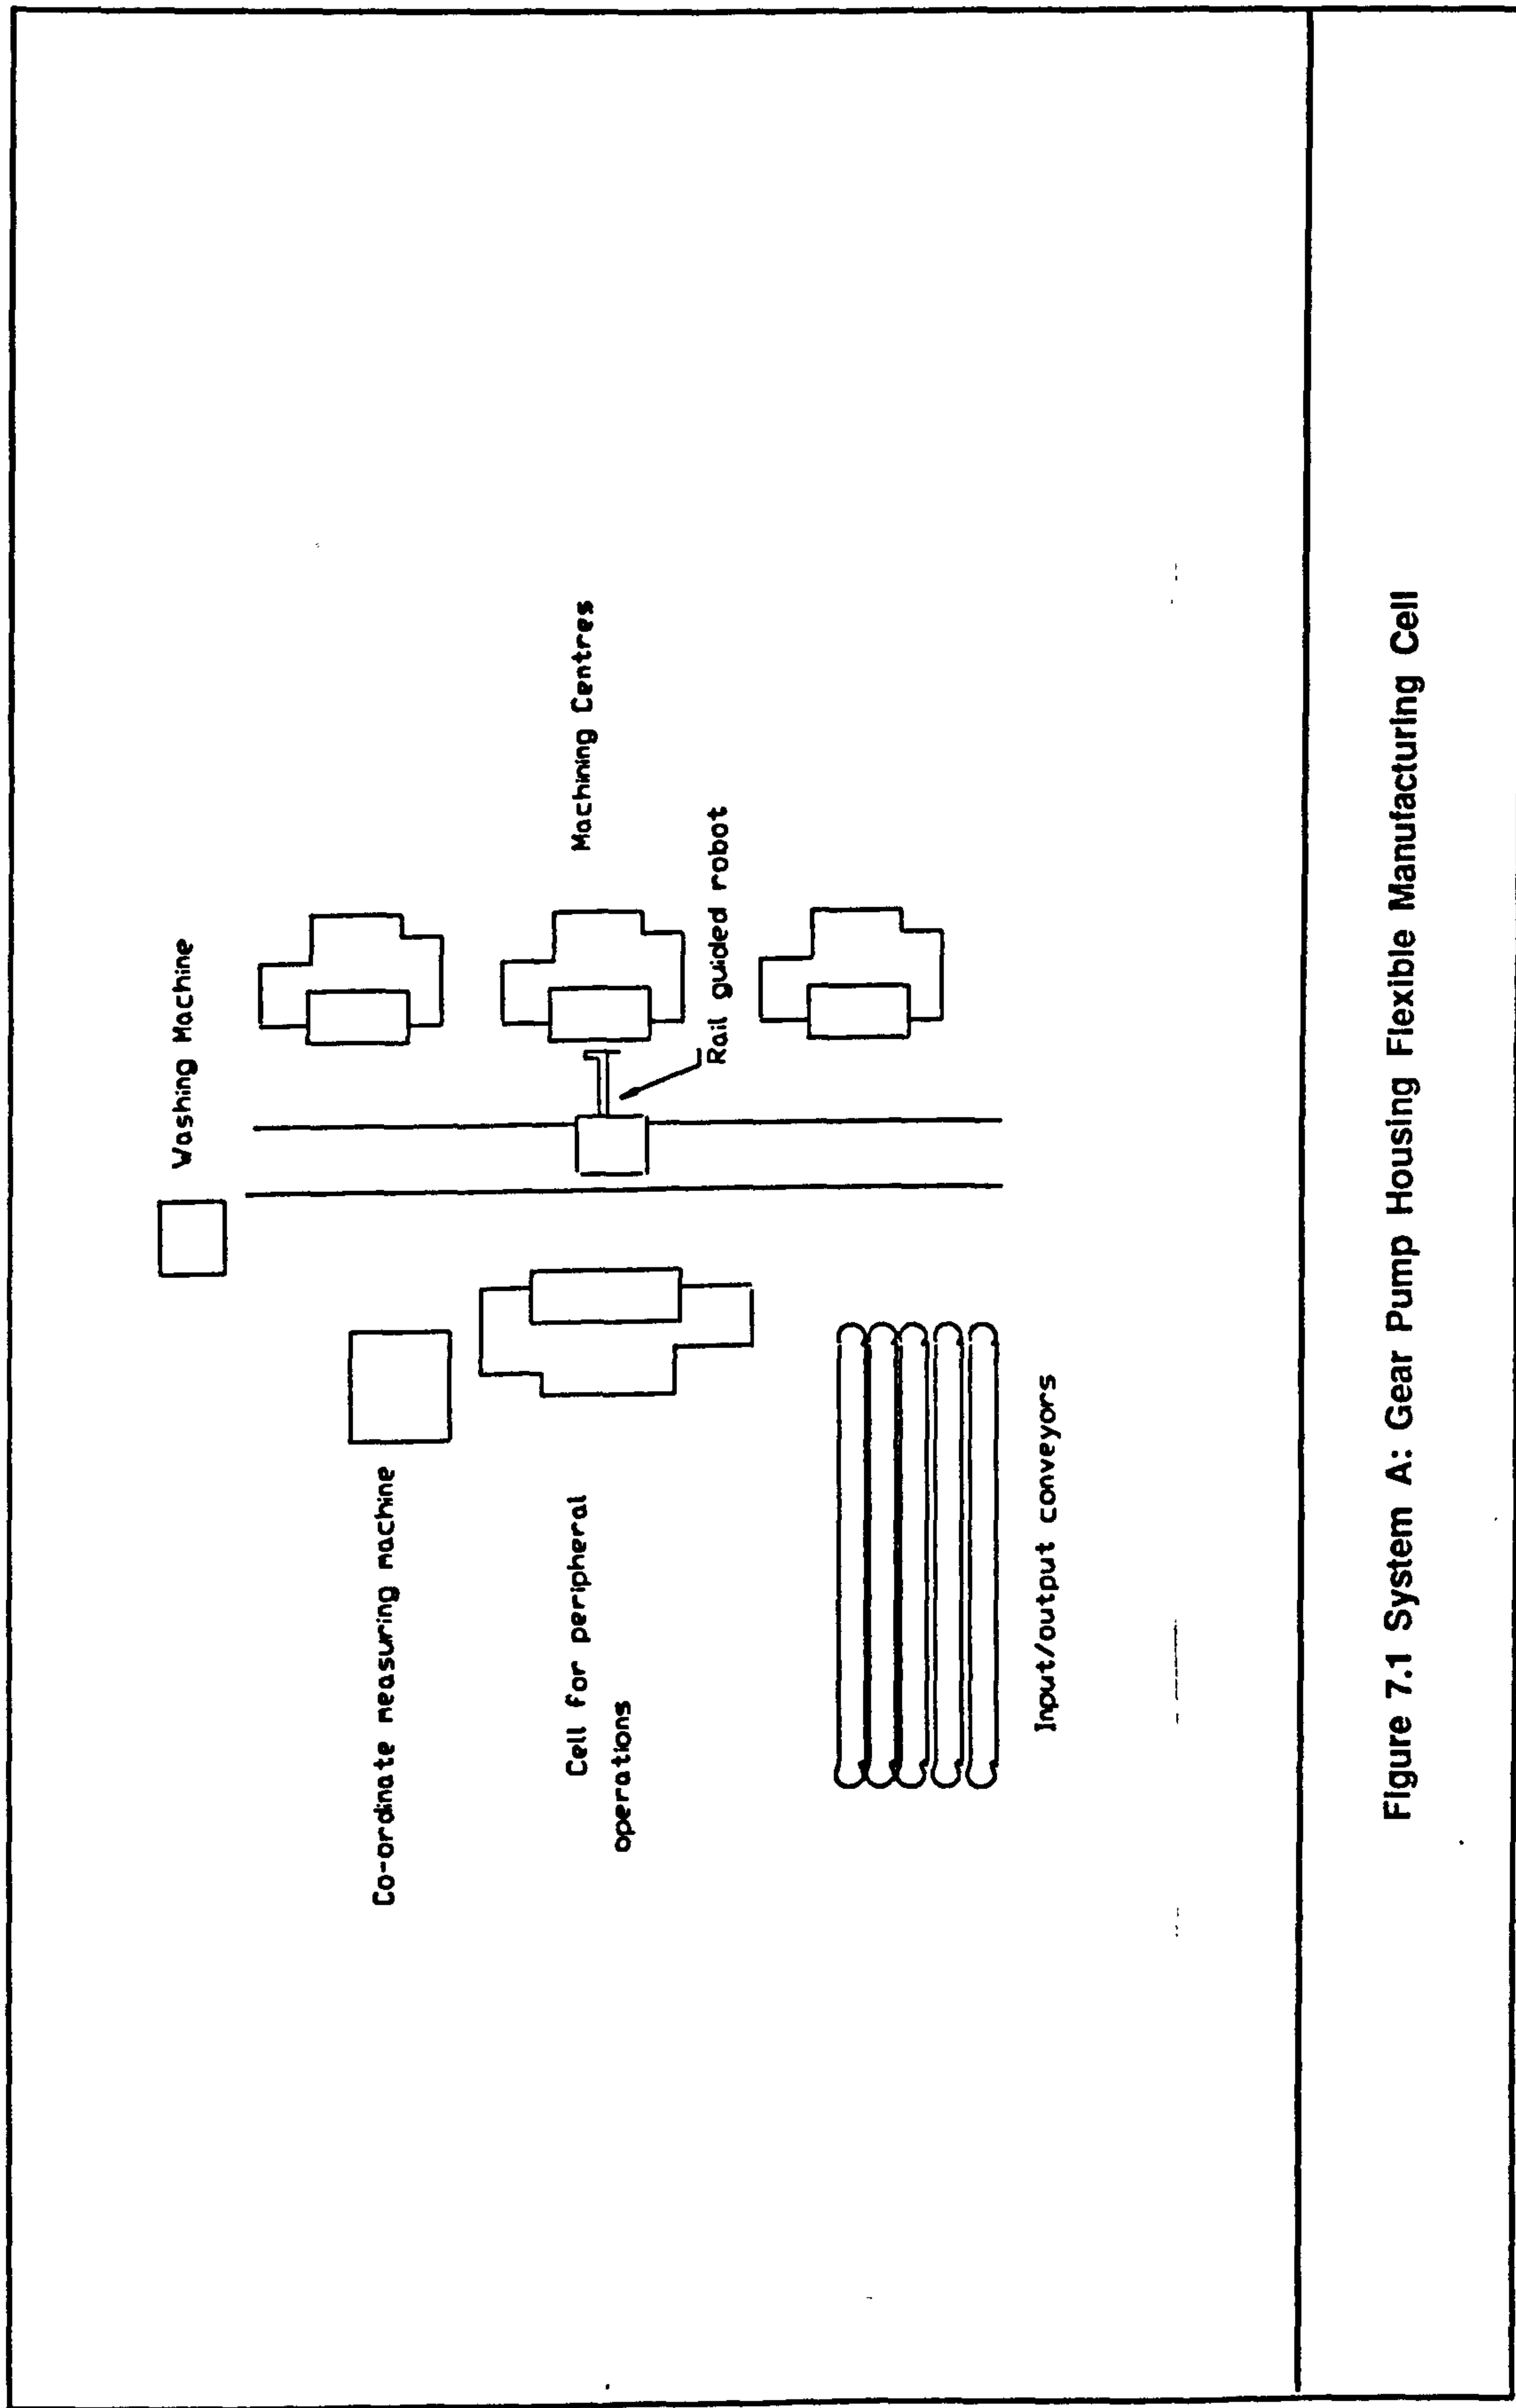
System A: Gear Pump Housing Flexible Manufacturing Cell
